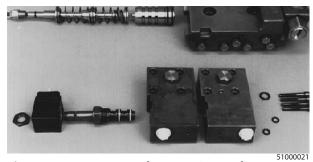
H1•H2 and K1•K2 Control Components
